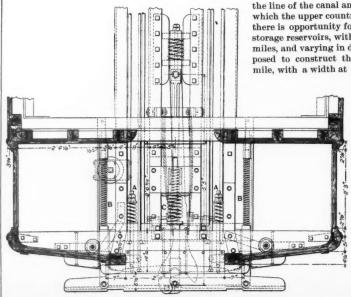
Plan of Platform and Draft Gear-Wagner Extended Vestibule
